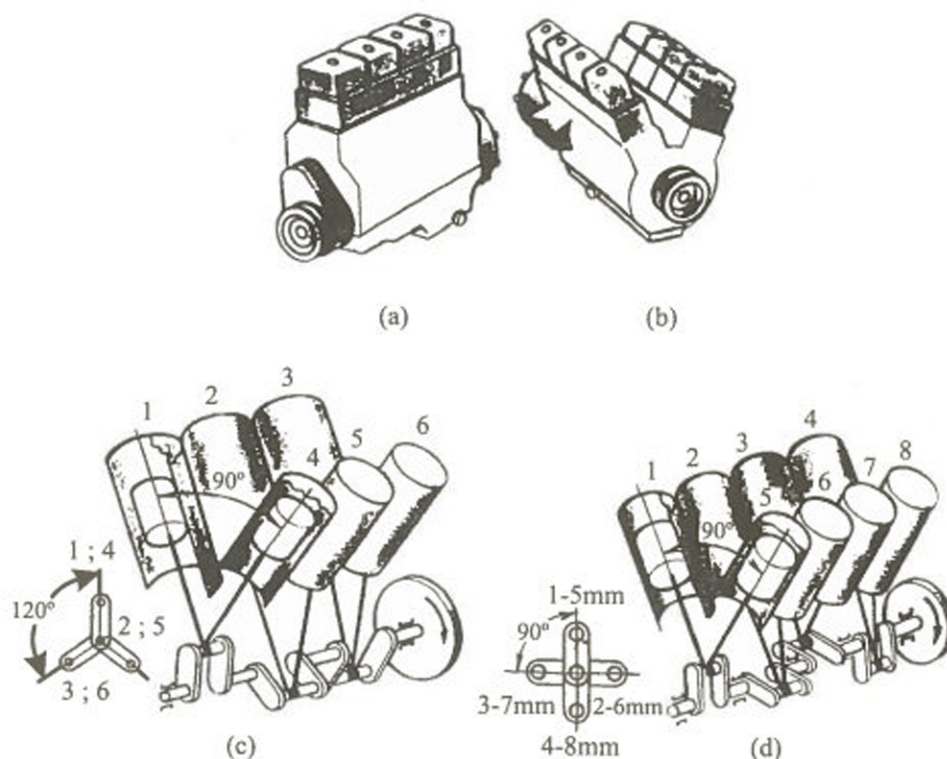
Multi-Cylinder Engines. (a) In-Line Cylinder Arrangement; (b) V-Type Cylinder Arrangement; (c) and (d) Crankthrow Arrangements in V-6 and V-8 Type Engines, Respectively; 1 Through 8—Serial Numbers of Cylinders.
